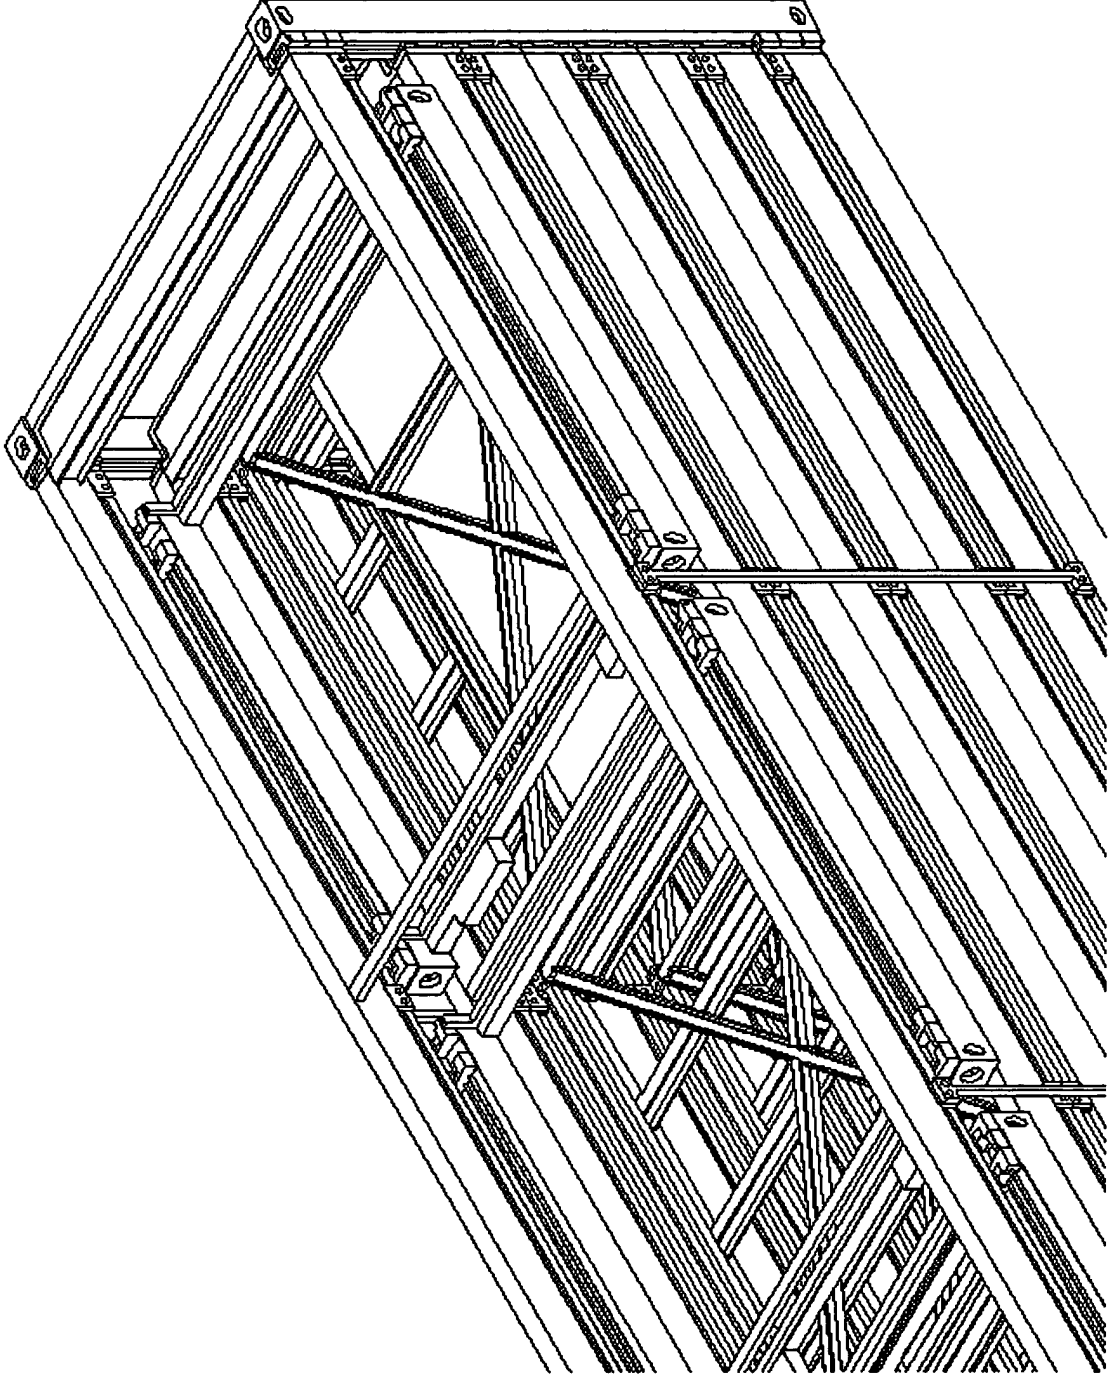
A: Detailed isometric view of the 40 foot collapsible cargo container frame loaded with three collapsed 40 foot collapsible cargo container frames
